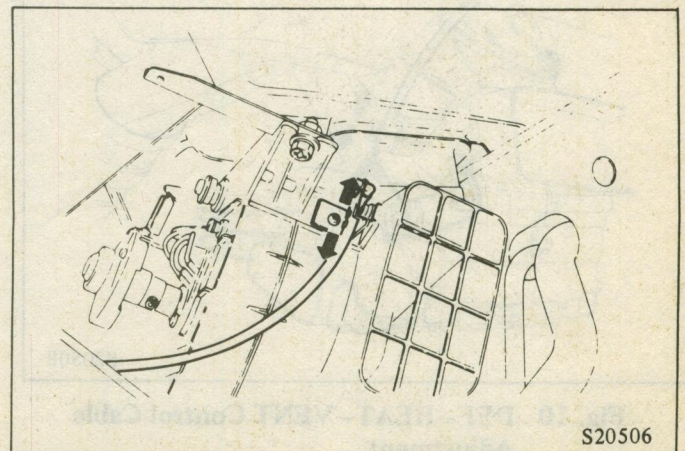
INSIDE-OUTSIDE Control Cable Adjustment
